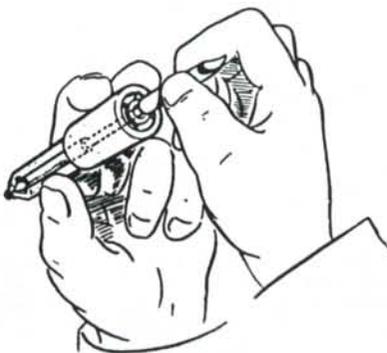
Use a seat scraper to clean all carbon from needle seat in tip of nozzle by rotating scraper while pressing it against seat.
